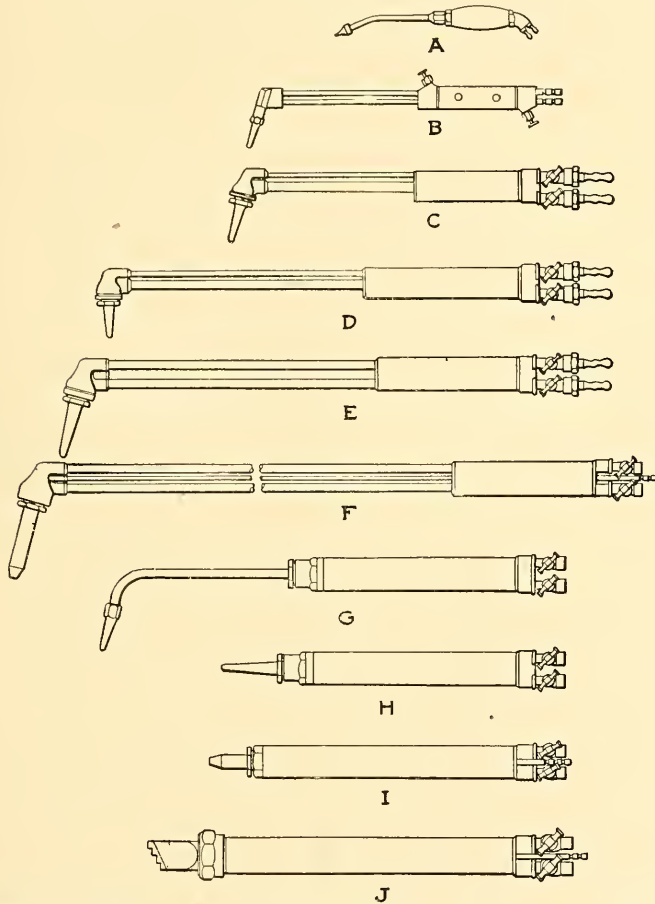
Various Models of Davis-Bournonville Welding Torches.
